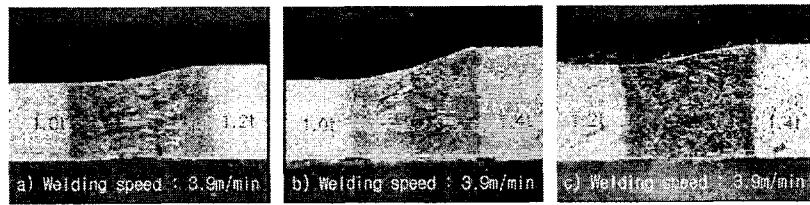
Butt weld cross section (welding speed: 3.9m/min)
